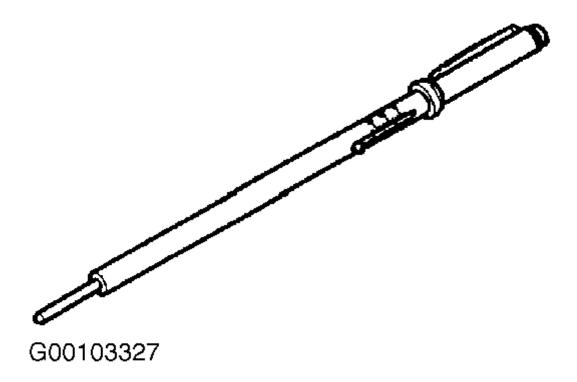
Identifying Brake Lining Measuring Gauge (34 1 260) Courtesy of BMW OF NORTH AMERICA, INC.
